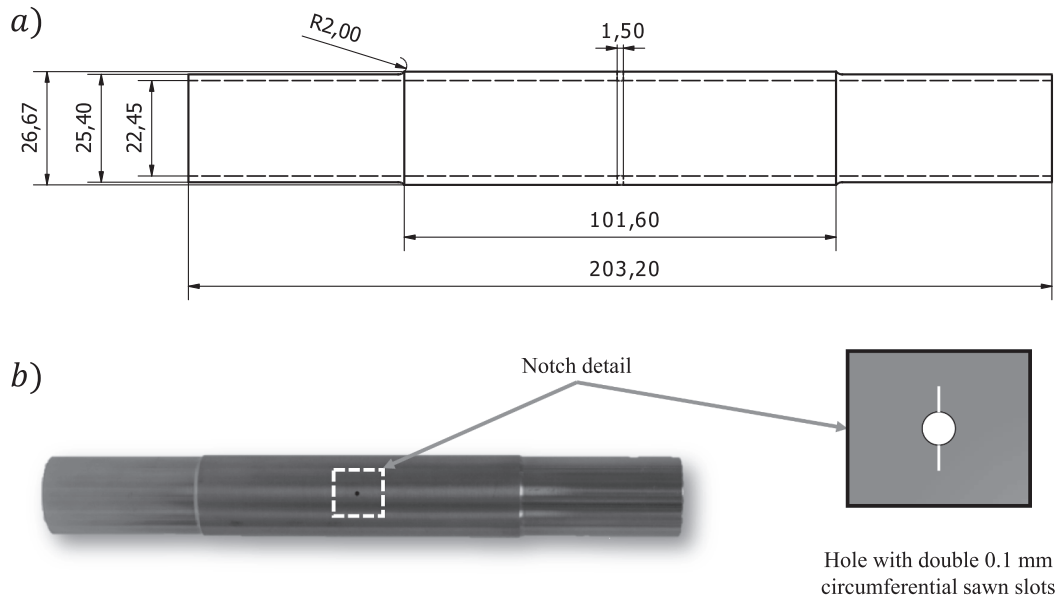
304L-SS specimen used during fatigue test. (a) Specimen drawing and (b) manufactured specimen showing a notch detail.
